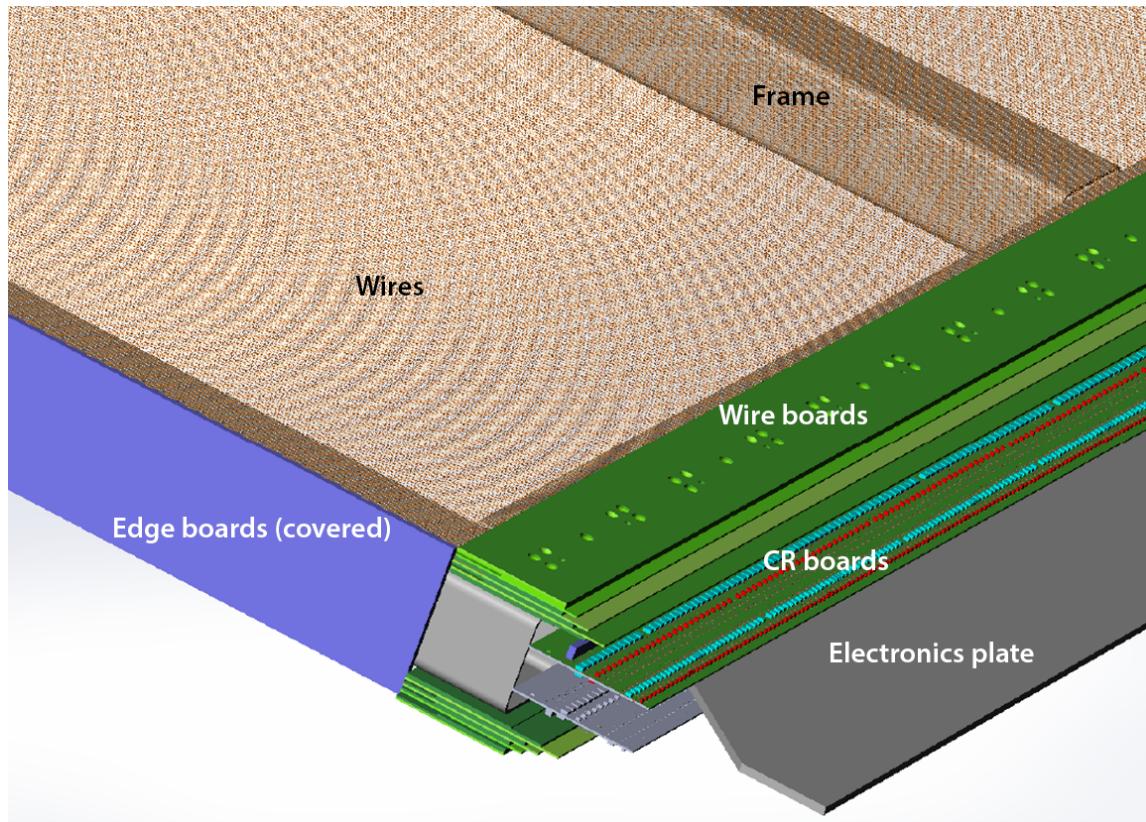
A close-up view of a partially assembled corner of an APA. The wire boards and CR boards are shown but the “cold electronics boards”, for data acquisition, are not shown. They mount on the electronics plate and connect electrically to the CR boards.
